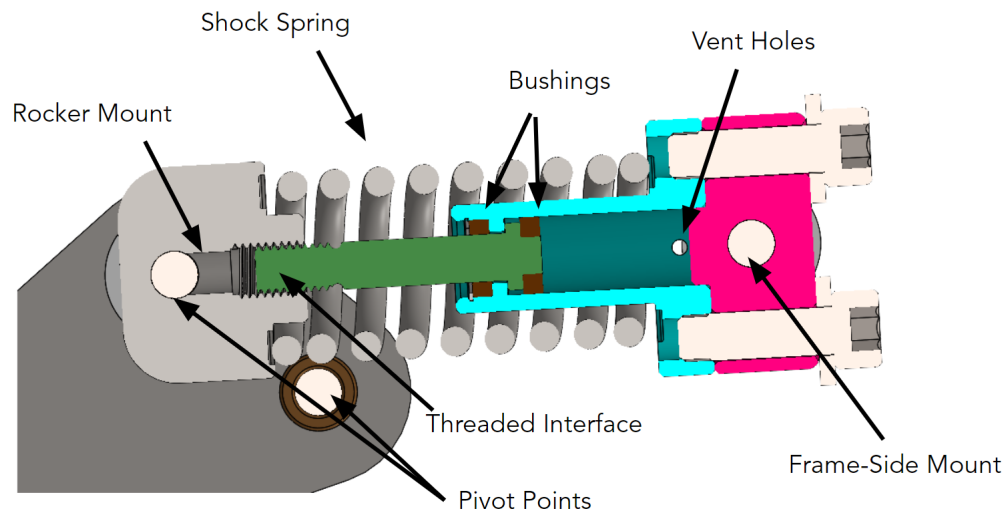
Cross section of the shock design, showing both the rocker side mount and the frame-side mount. Connecting these is the shock rod, with a threaded interface to enable length adjustments, which slides within the shock housing, shown in blue. In parallel is the shock spring, which together provide both motion resistance to bumps and damping to prevent resonant motion of the crawler. A vent hole is included within the shock to allow for the water to escape, as it is an incompressible working fluid.
